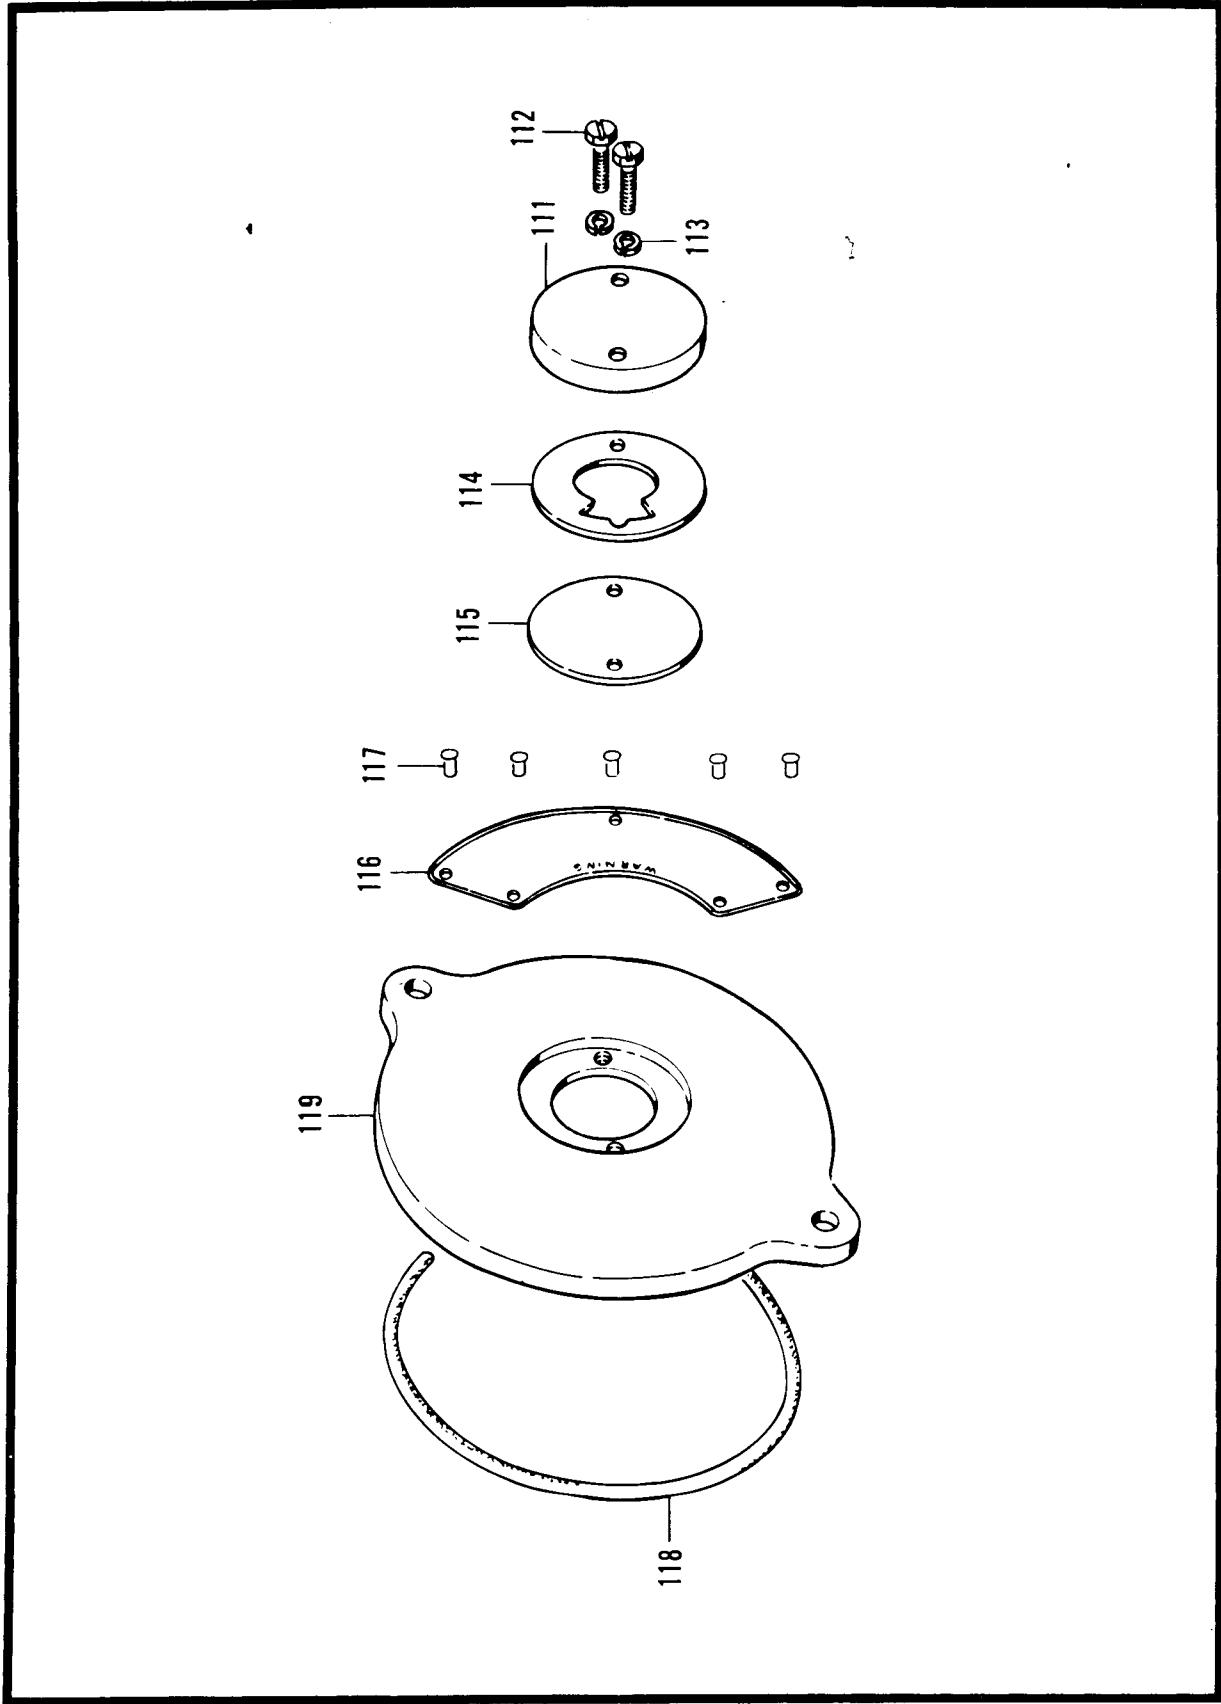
Magneto, Ignition (Breaker Assembly, Distributor (Sheet 2 of 10)
